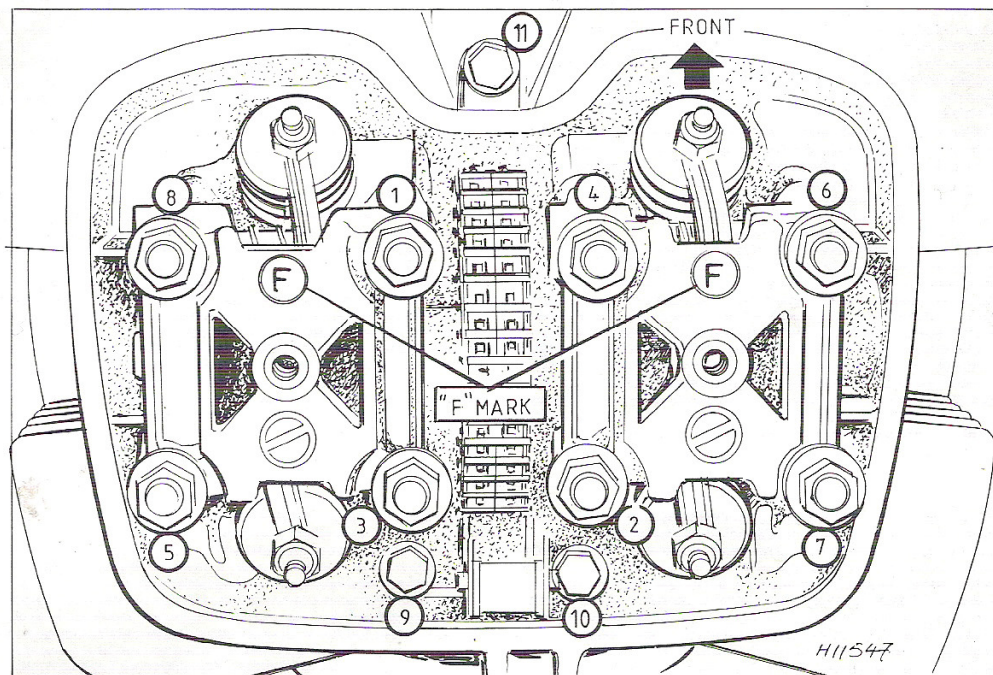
Cylinder head nut and bolt tightening sequence
